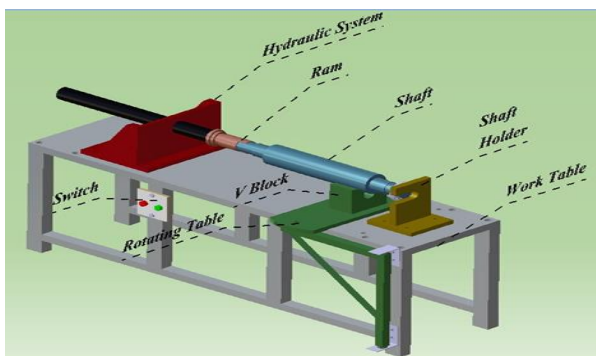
Modified Solution of Horizontal Bearing Press Machine
